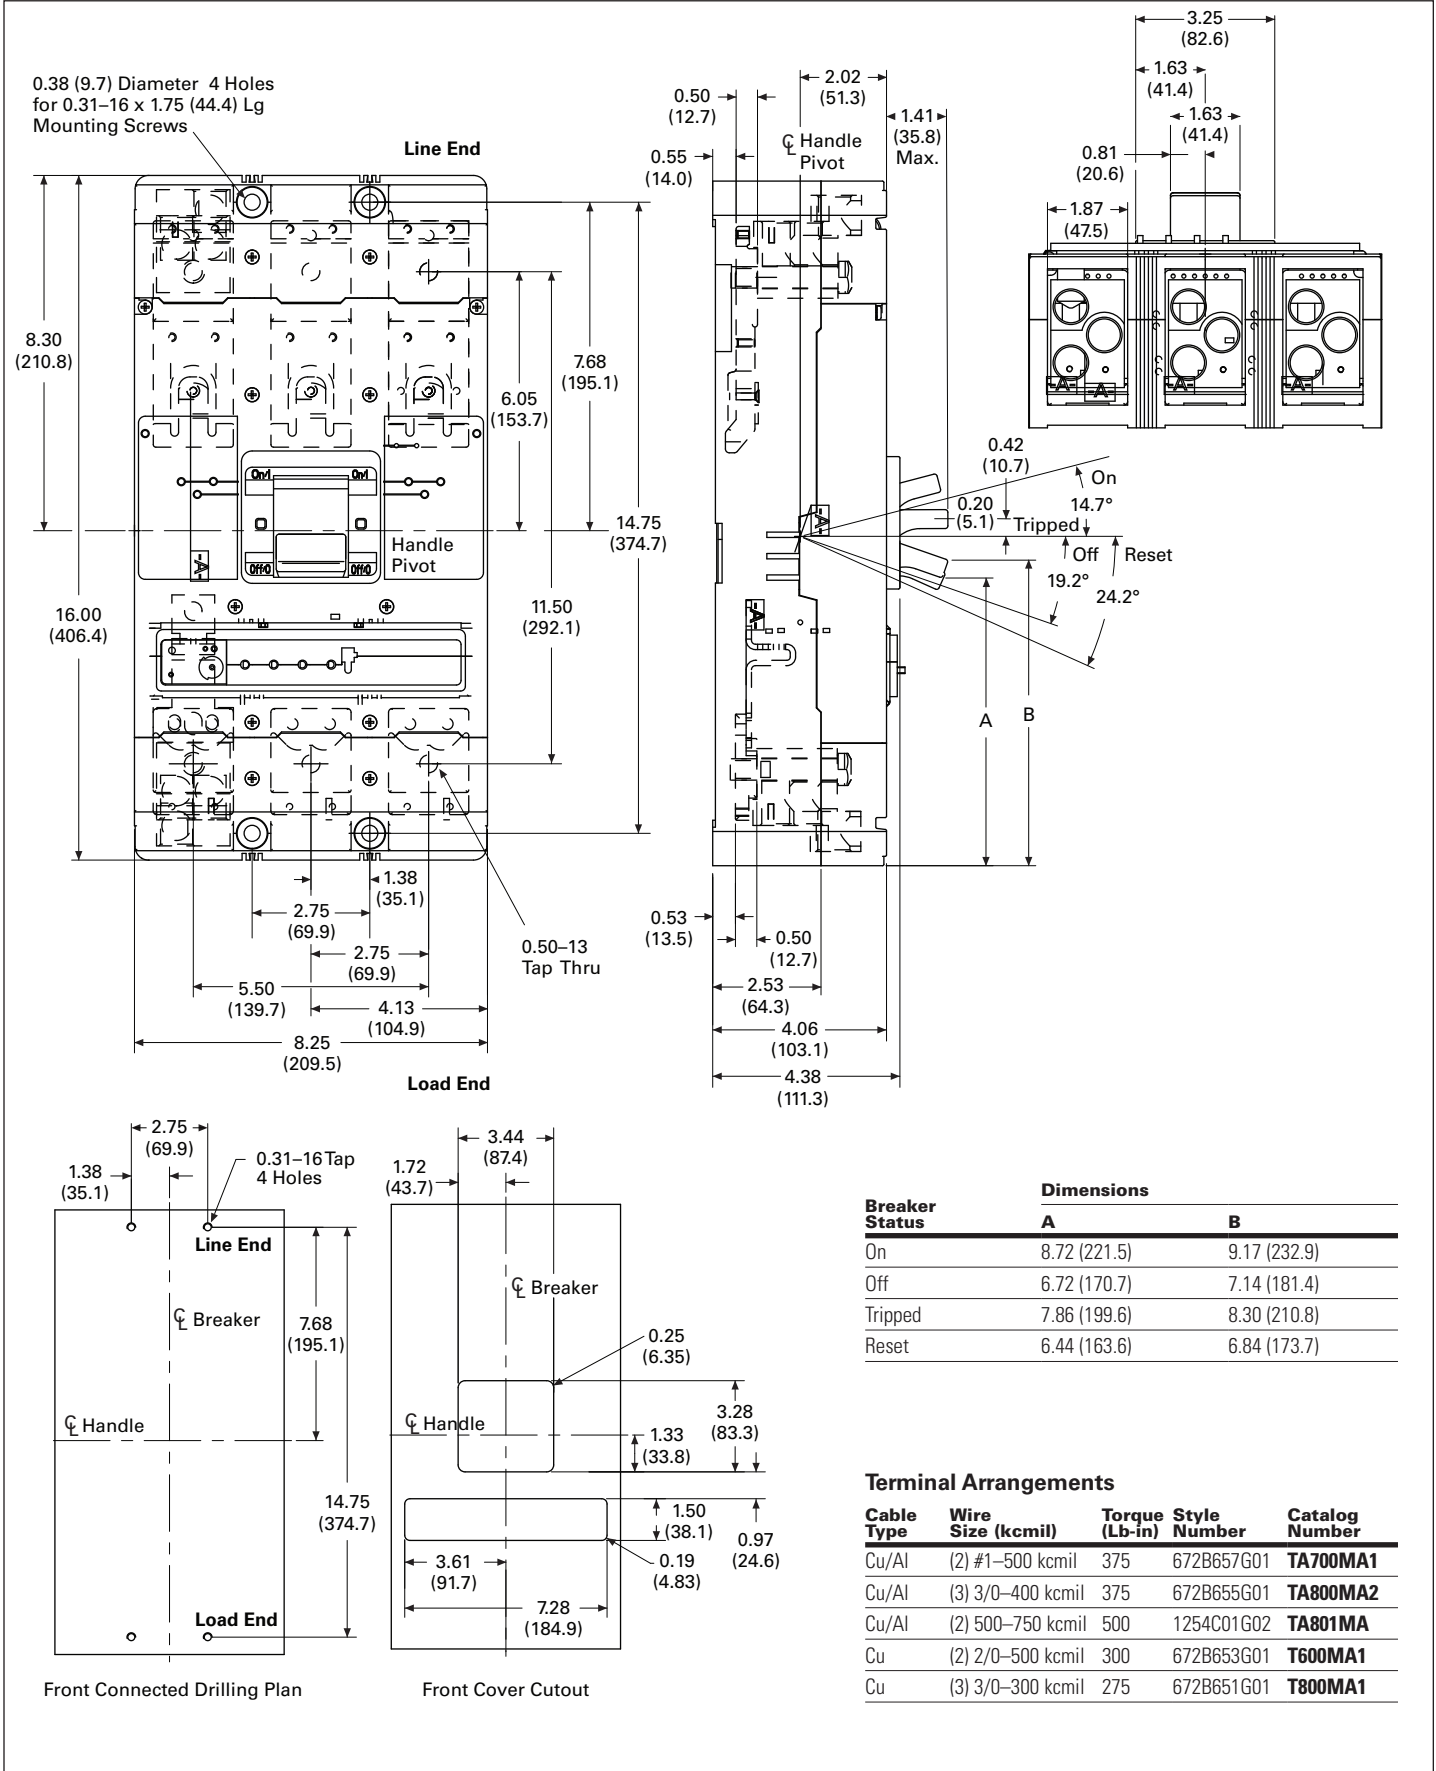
Type MG 700-800A Three-Pole—Dimensions in Inches (mm)
